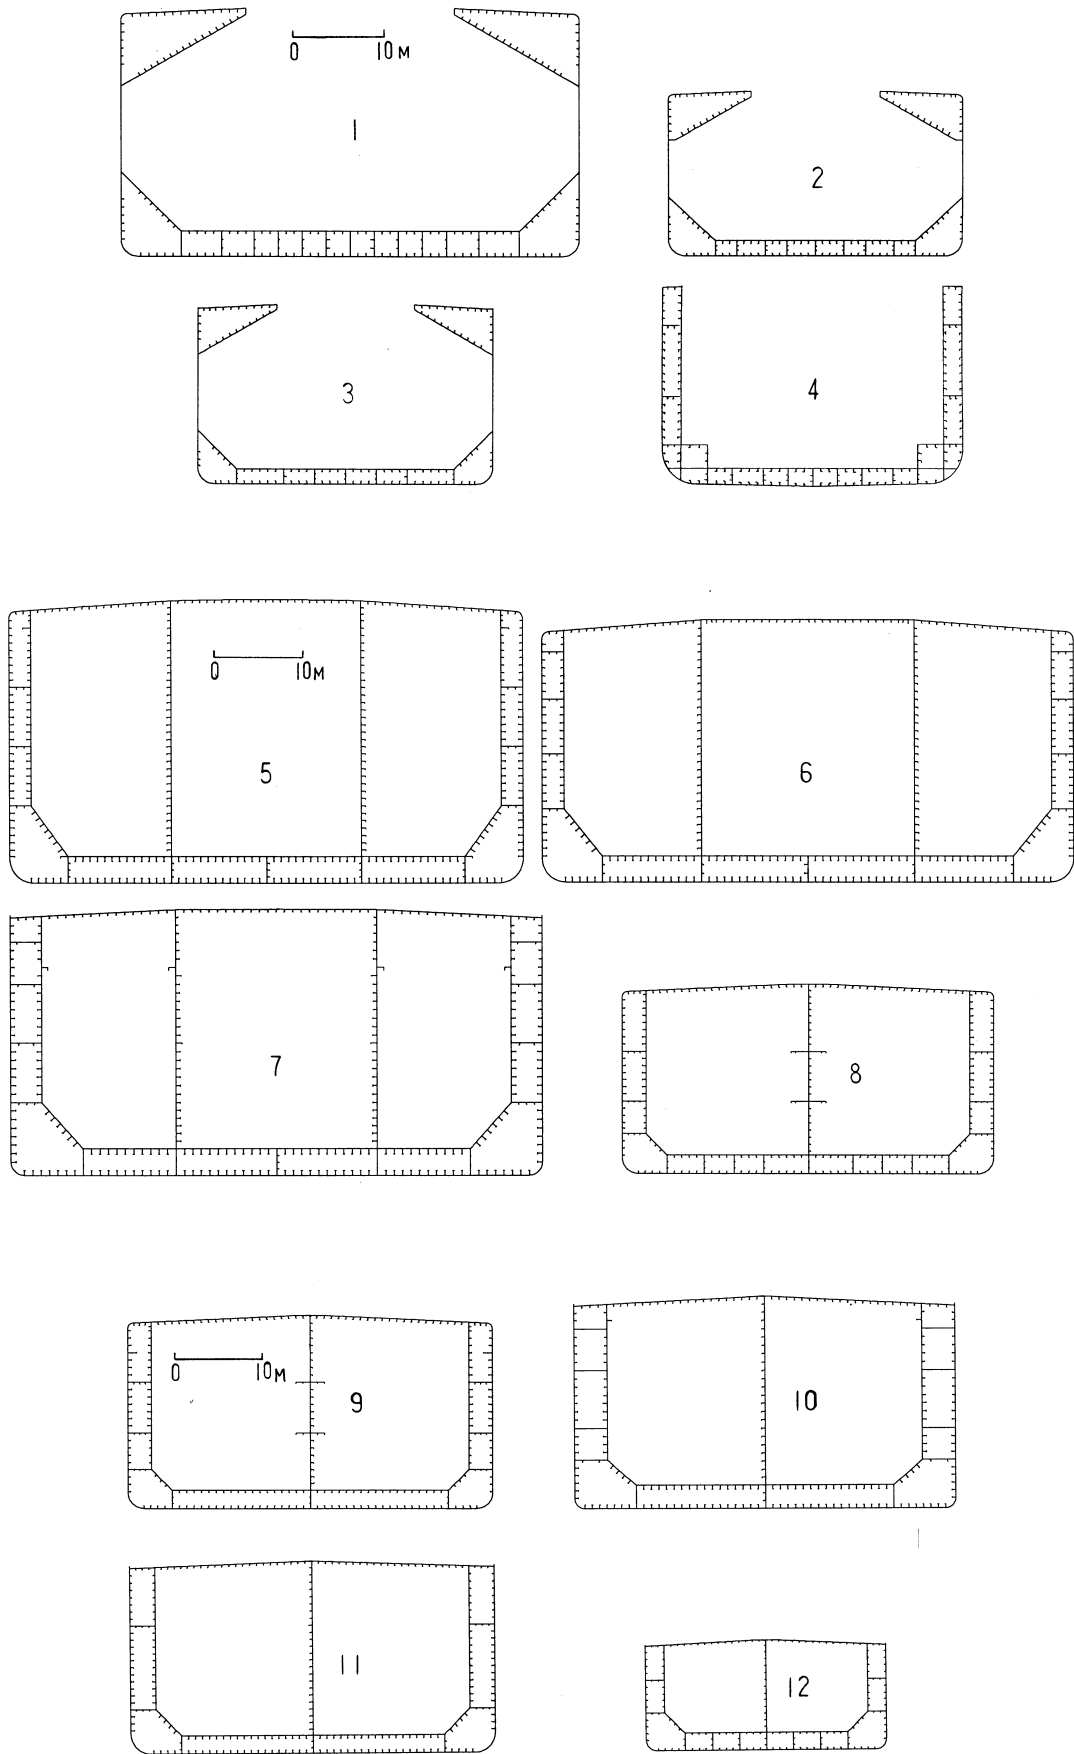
Hull girder cross-sections of Ships No.1 through 12
